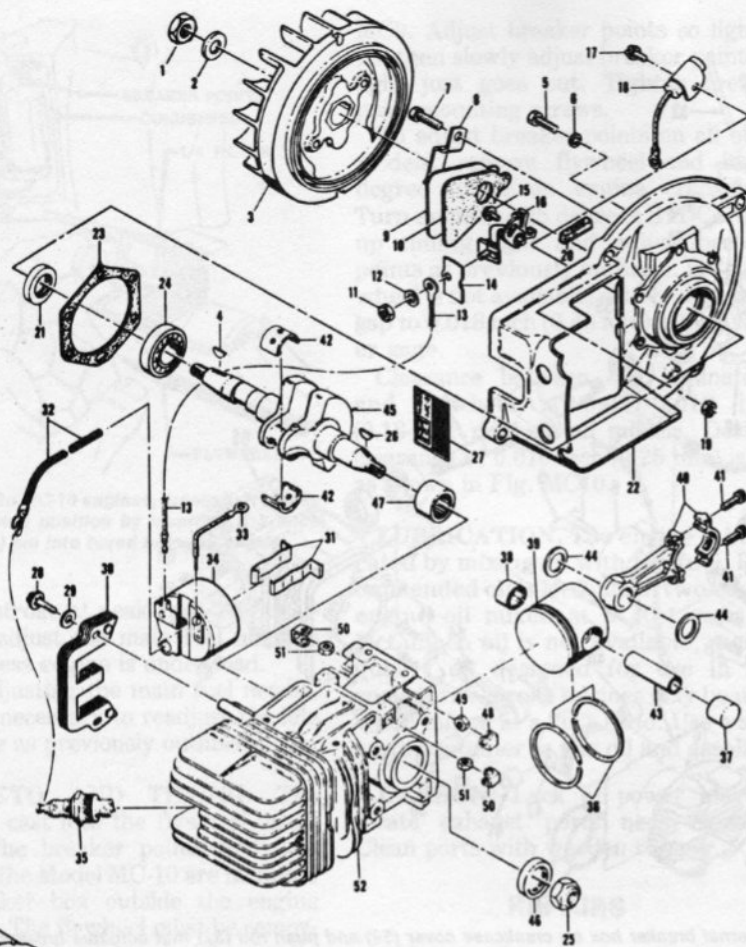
Exploded view of Model MC-2 bushing engine.
